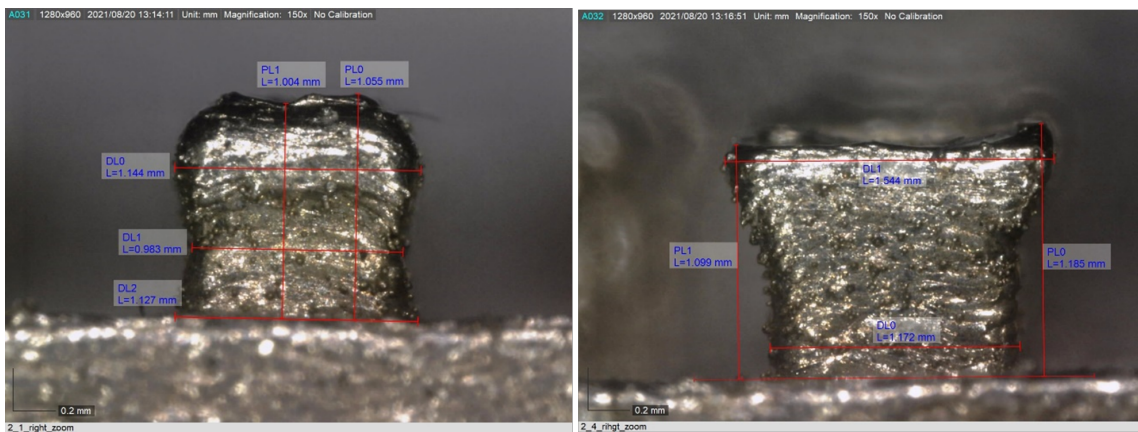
Batch 2 - Manufactured protrusion geometries
